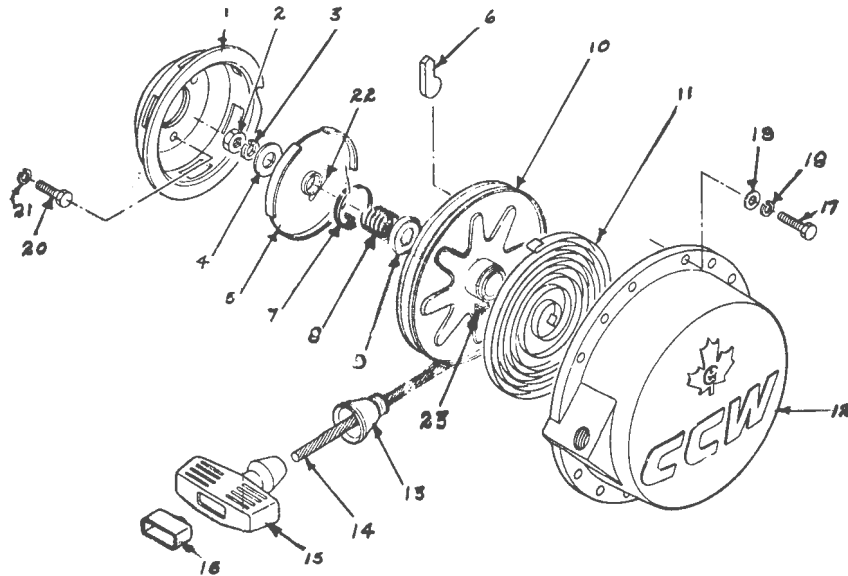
RECOIL STARTER – EXPLODED VIEW
